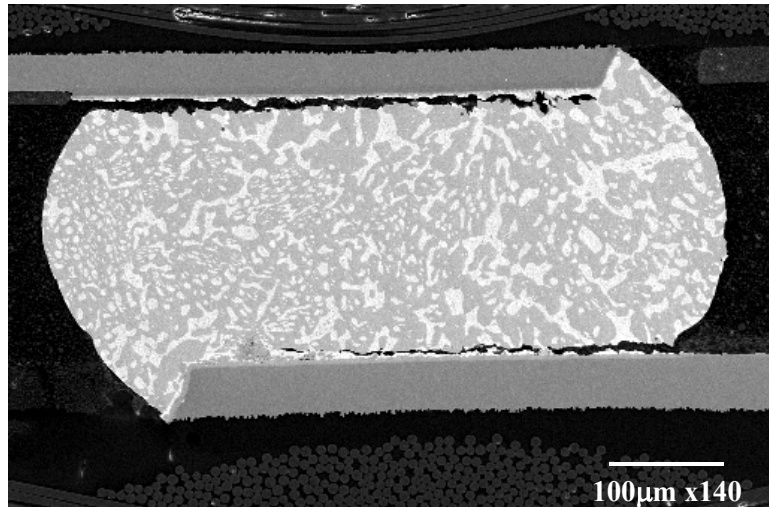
Simultaneous Crack Propagation Top and Bottom of the Solder Joint, 15 mm BGA, CAVE
